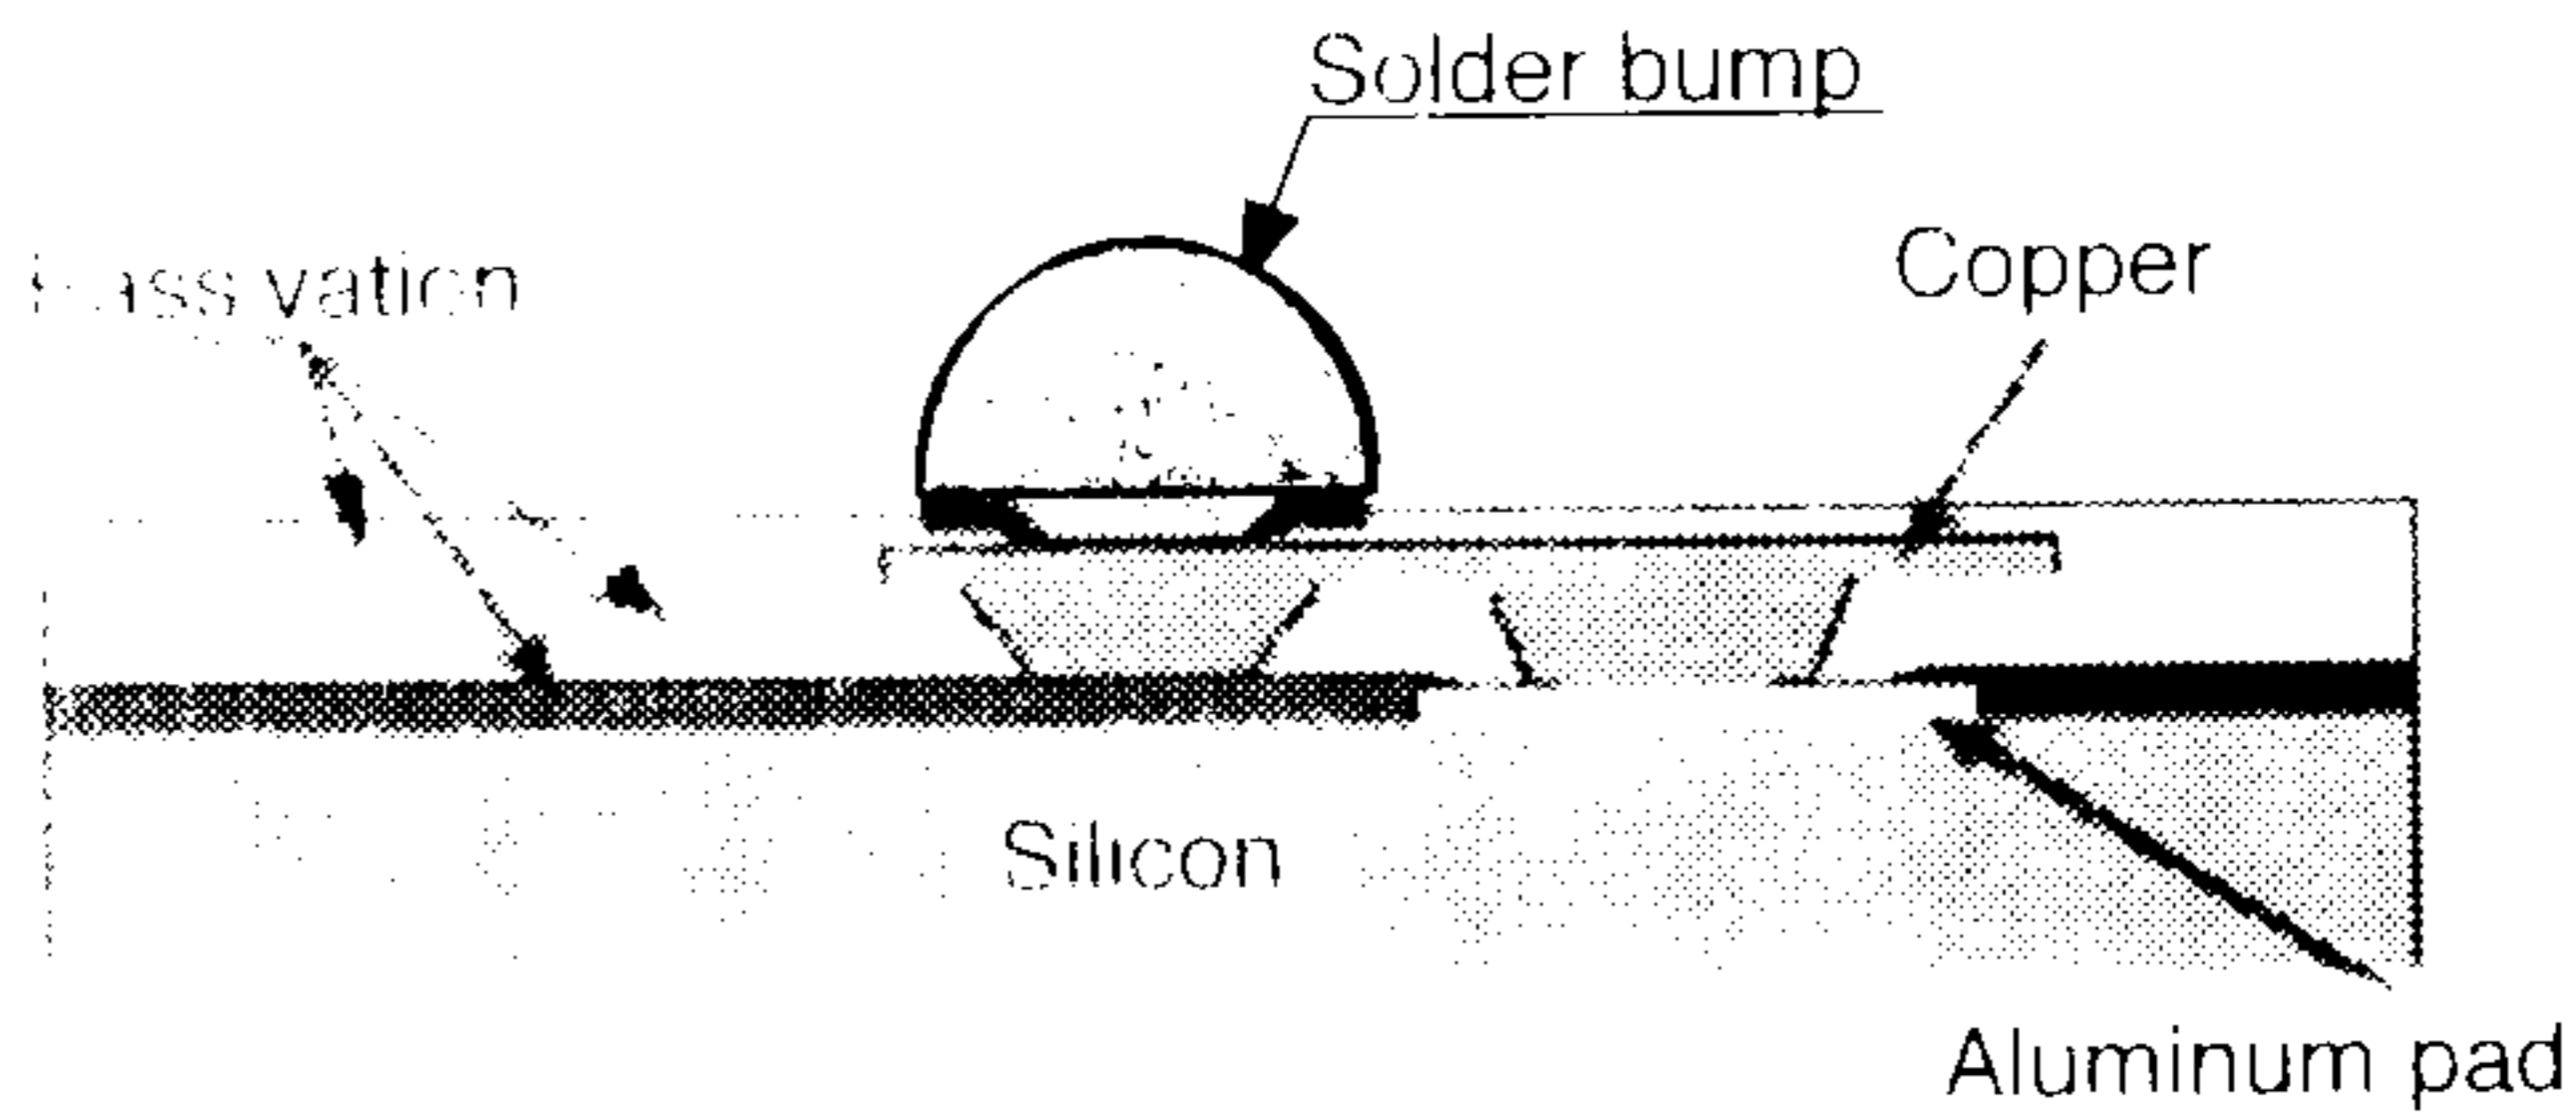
Placement of a solder bump directly on a chip to facilitate direct attachment to a PCB
